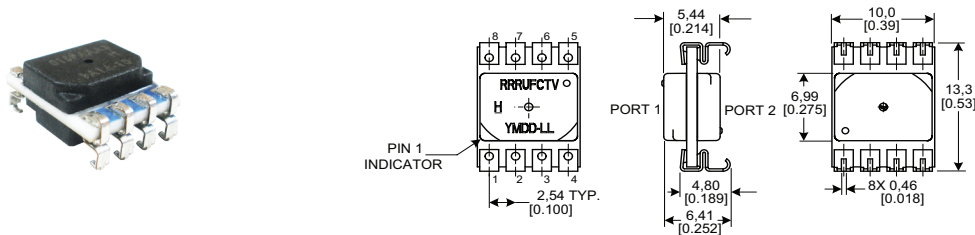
SMT Package Dimensional Drawings (for reference only: mm [in])
